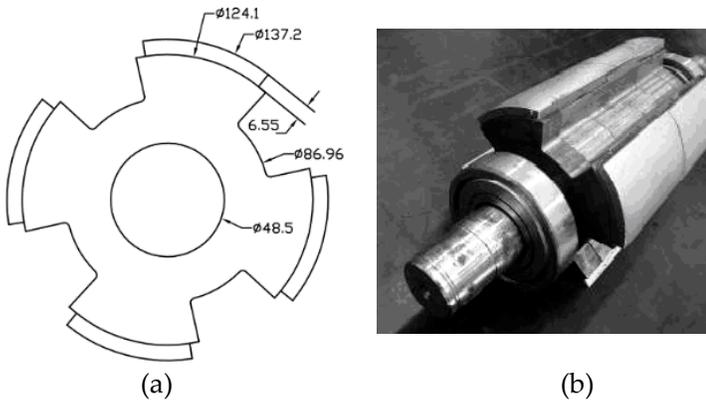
Rotor of protruding poles – (a) Schematic drawing – (b) Rotor assembled [11]
